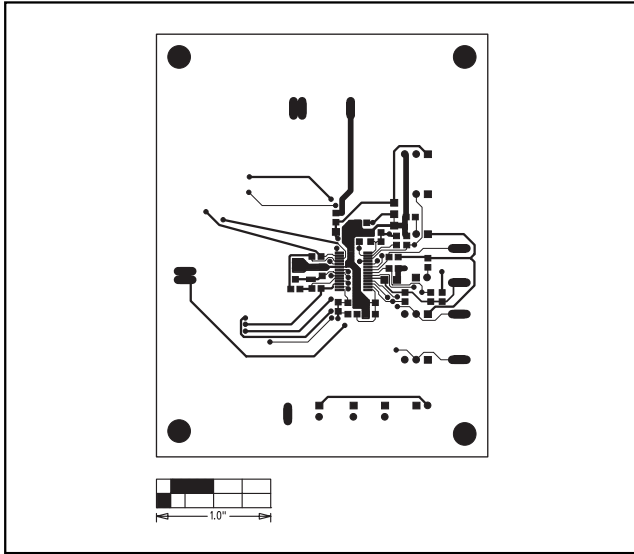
MAX1845 EV Kit PC Board Layout—Solder Side
